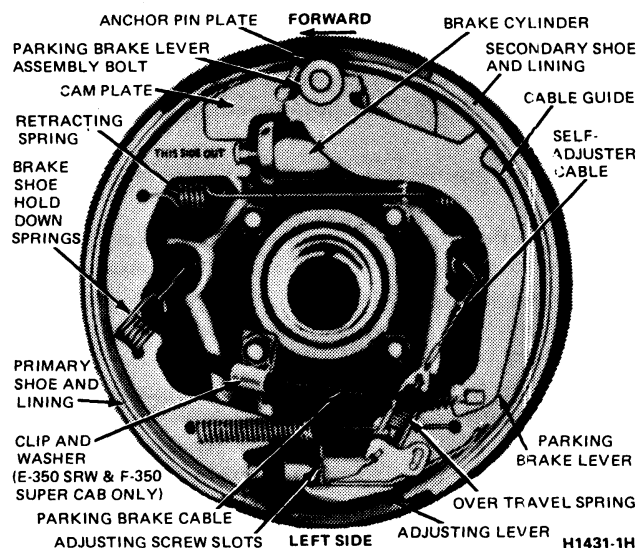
Parking Brake Assembly-Cable Operated—E-250—E-350, F-250—F-350 H.D. Rear Brakes
